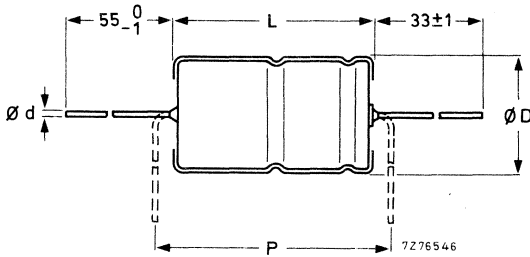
Style 1; see Table 1 for dimensions d, D, L and P.
